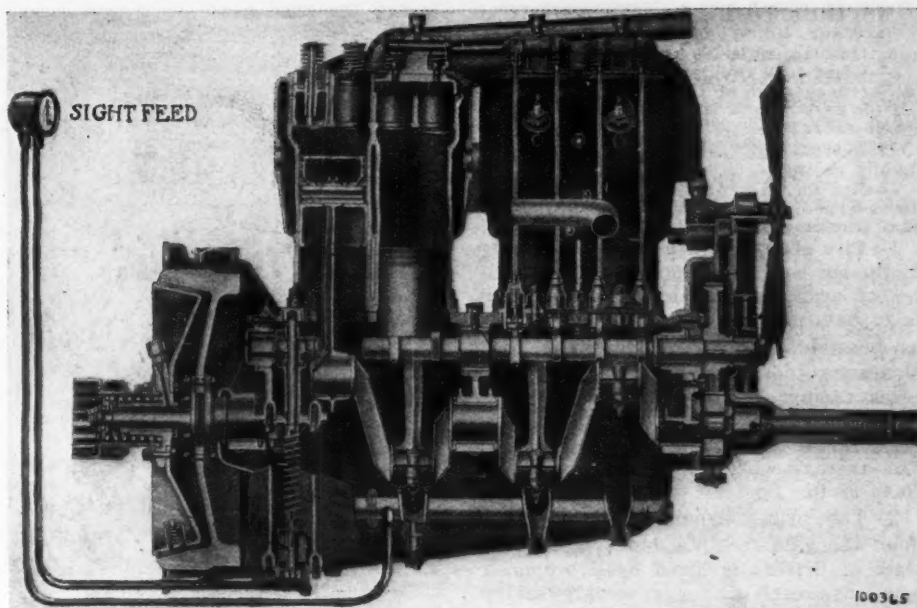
Cutaway view of Buick 35 engine showing installation of sight feed in oil circuit
